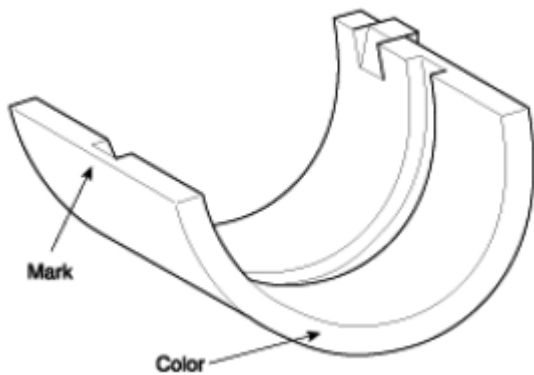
Identifying Crankshaft Main Journal Mark Location
